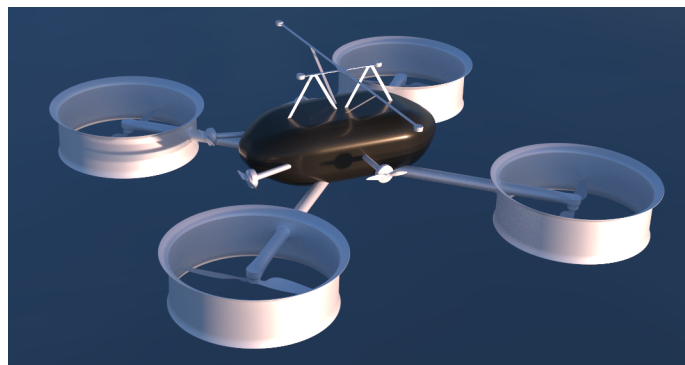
Final quadcopter design with its clamping mechanism to catch the Fixed-Wing.
